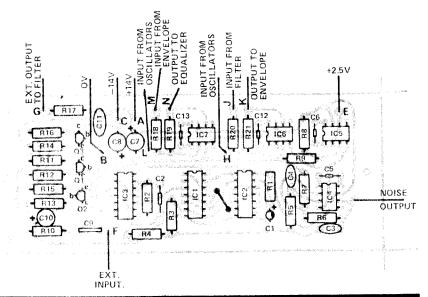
Printed circuit board layout for the auxiliary board, Full size 142 x 57 mm.
